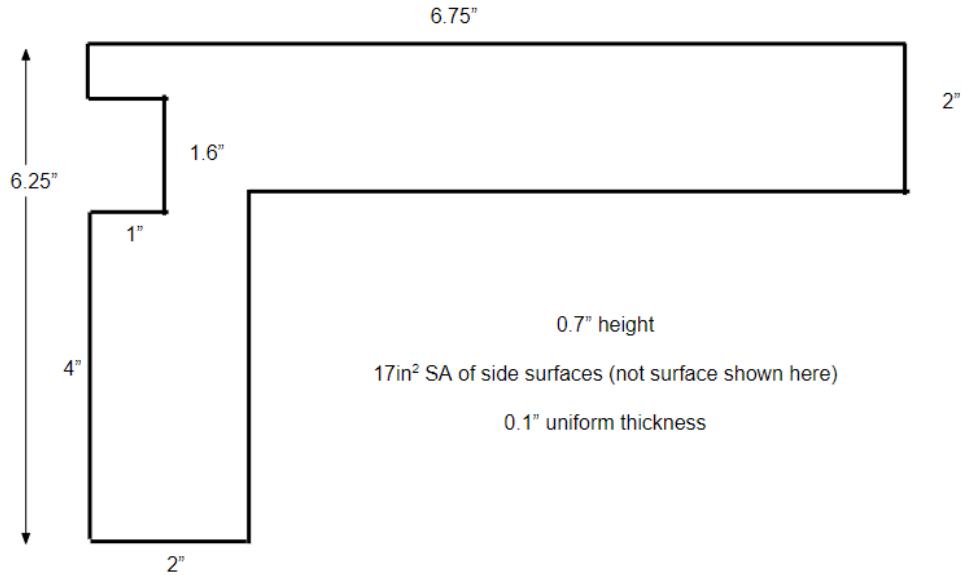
Glue Gun Housing Dimensions for Purposes of the Quiz Problem
